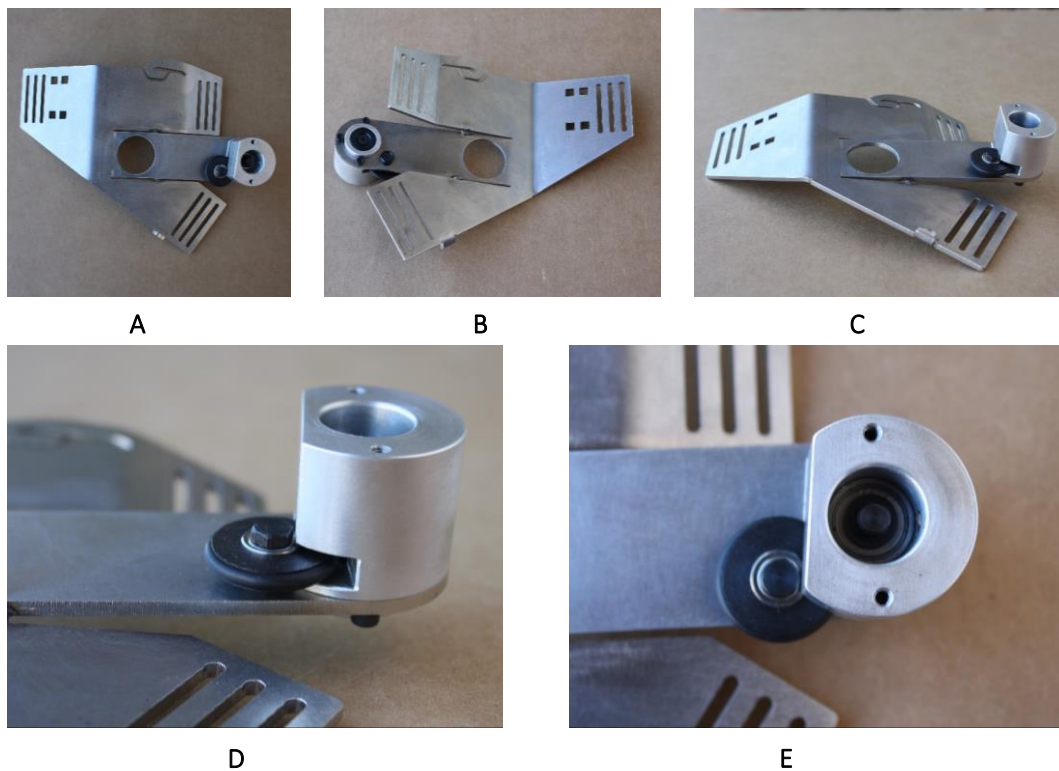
Pelvis plate of the powered exoskeleton realized in stainless steel AISI 304. Front (A), behind (B), perspective (C) view of the plate. Zoom view (D-E) on the support for the secondary angular sensor and the free wheel.
